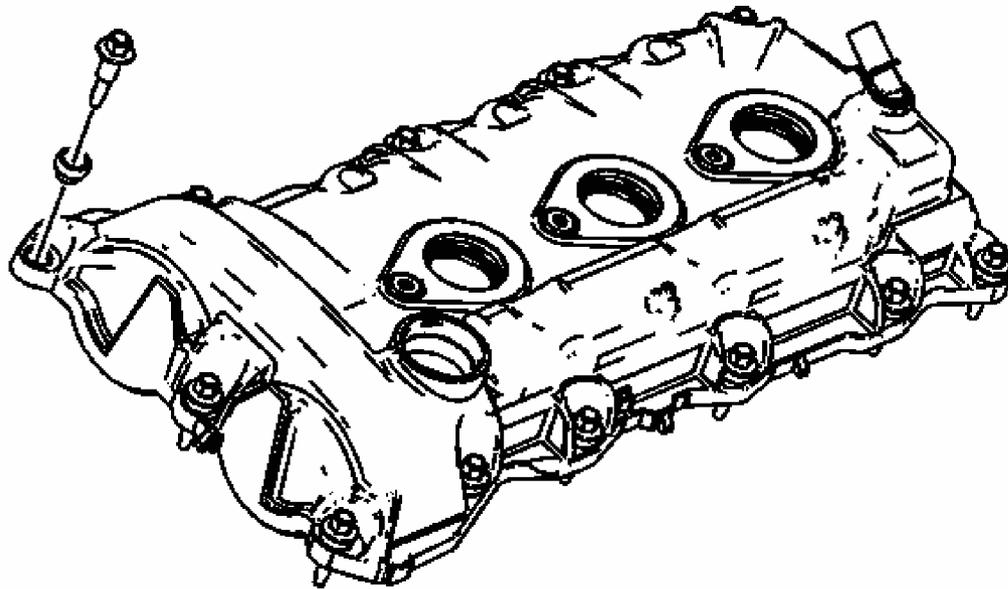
Locating Camshaft Cover Bolts & Grommets
